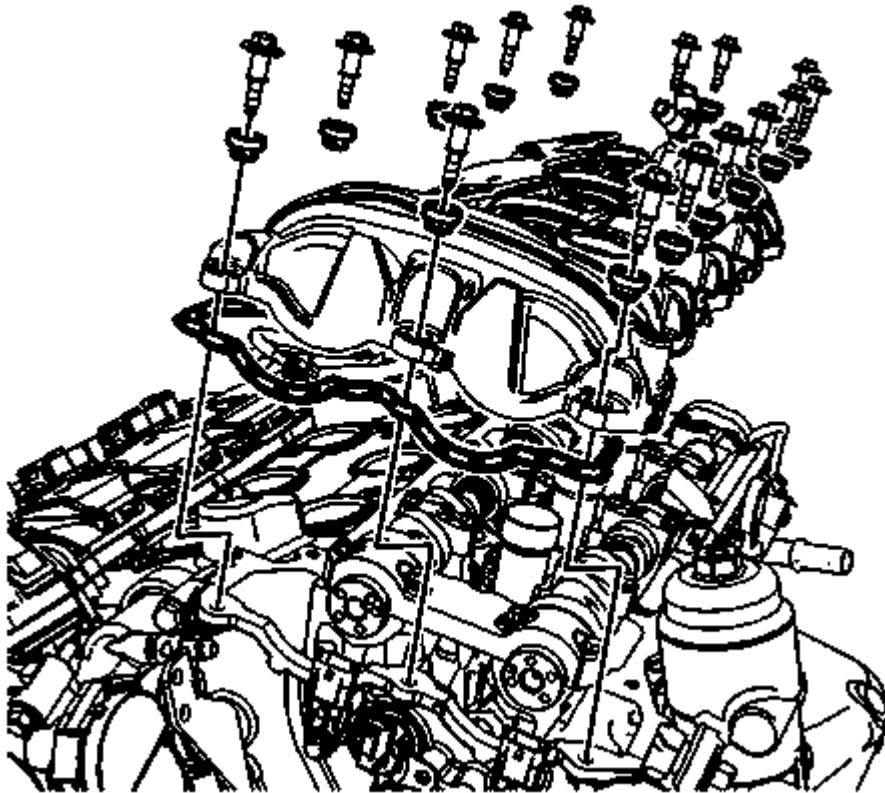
Identifying Camshaft Cover Seal & Grommets
